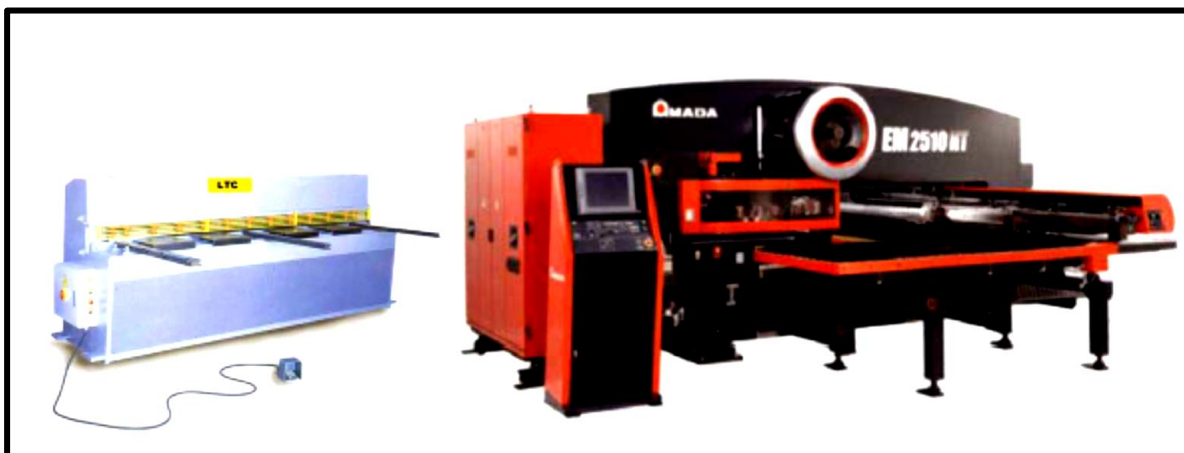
(a) Hydraulic sheet metal shearing machine (b) A CNC turret-type sheet metal punching machine
